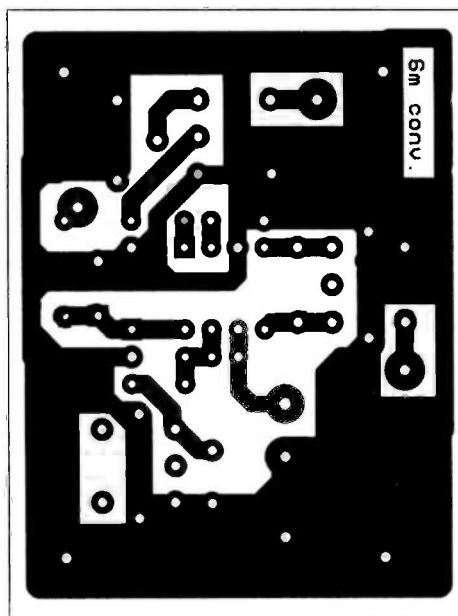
Track side of the printed circuit board. (Reduced to 70% of actual size)
